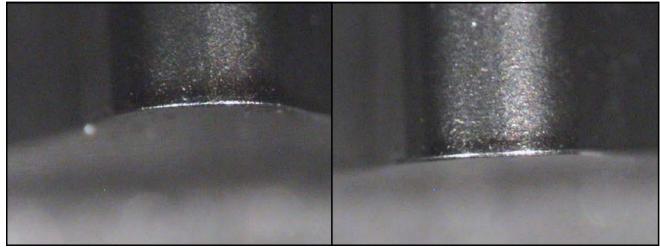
Hob tooth after 300 gears (magnification 63×) Ovako 1580 (left); reference material (right).
